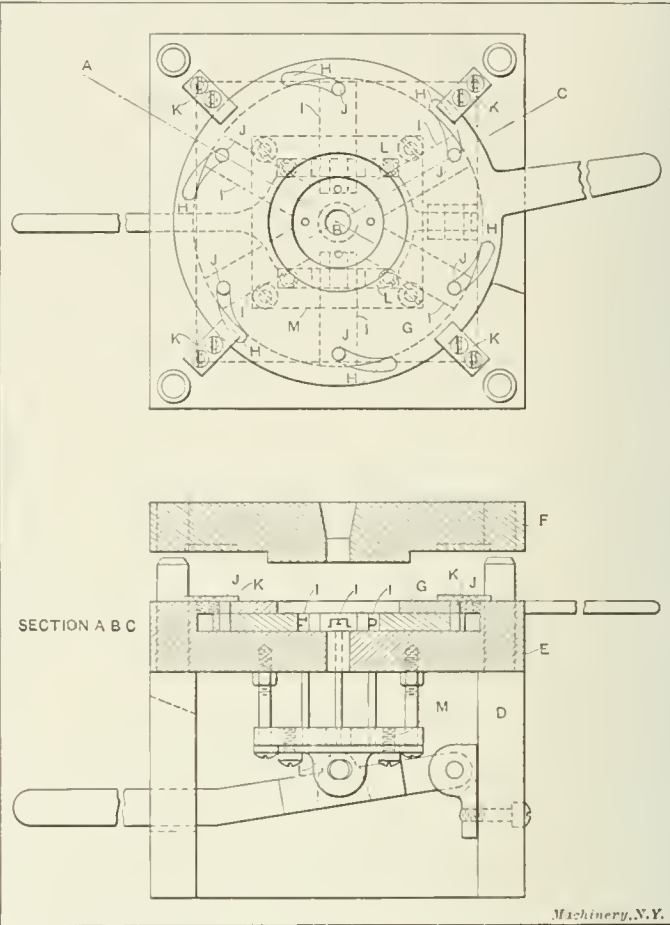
Slide Die for Casting the Printing Wheel shown in Fig. 9
